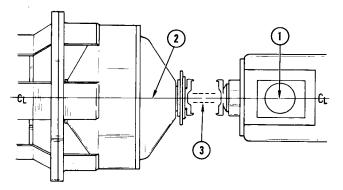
LATERAL ALIGNMENT TOLERANCE
